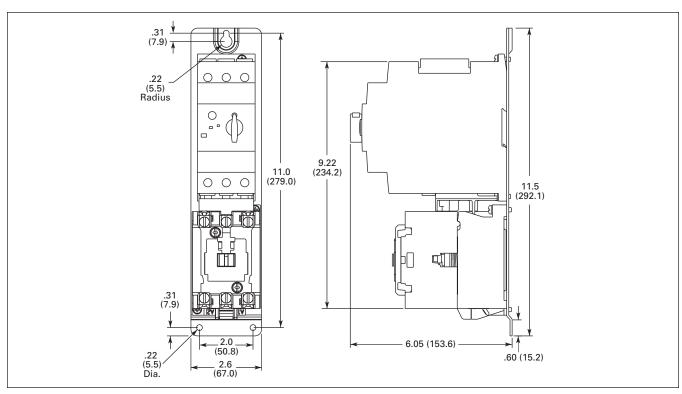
Non-reversing Combination Motor Controller AE318 (A308 MMP + C320WC65 WCL + CE15 65 mm Contactor) — Approximate Dimensions in Inches (mm)
